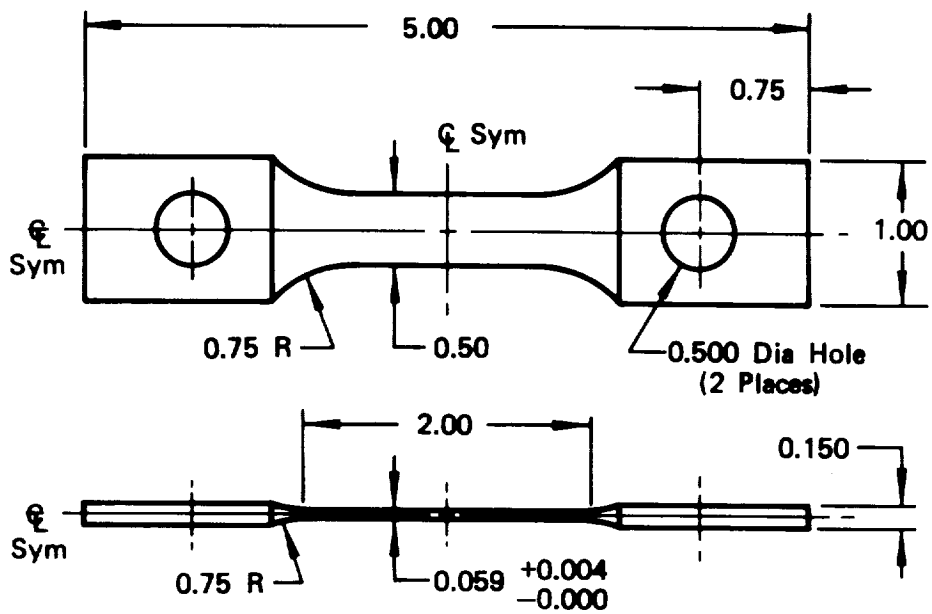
FORGING TENSILE SPECIMEN (PART I)
